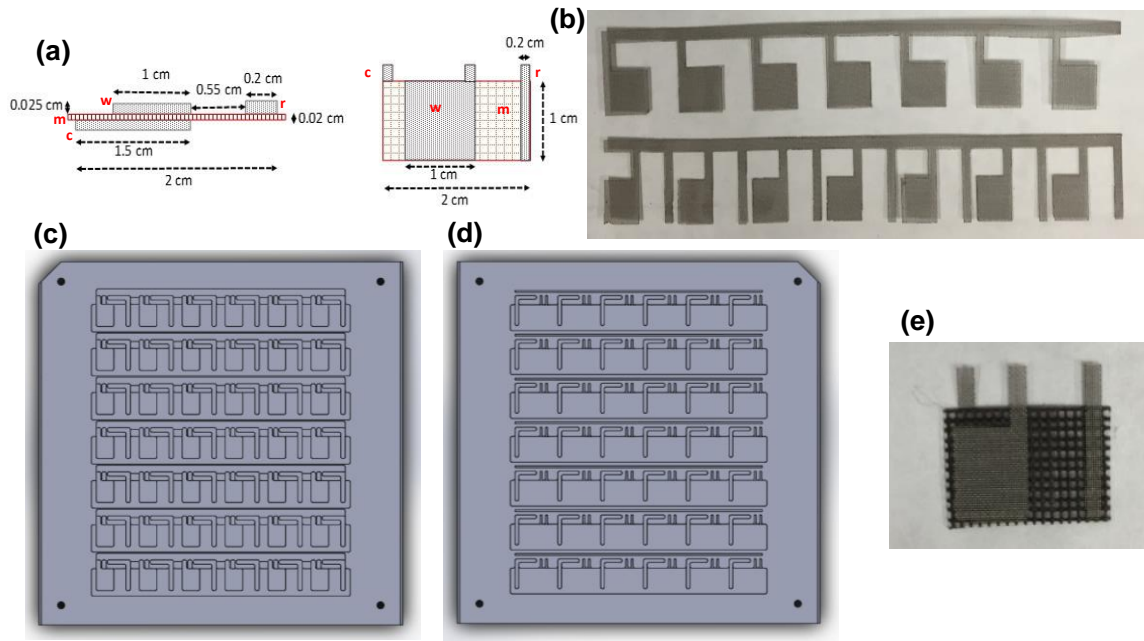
(a) design of the three-electrode fuel cell sensor; (b) the strips of the Monel electrodes after laser cutting; the CAD design of the aluminum-made mold (c) the bottom part and (d) the top part (e) the three-electrode fuel cell sensor after fabrication
